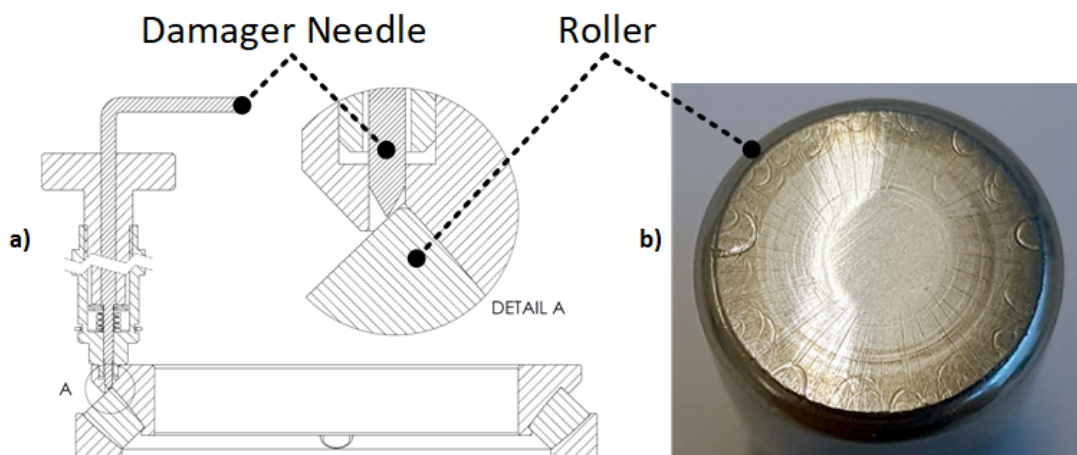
(a) Schematic drawing of the damage mechanism. (b) Scratches on the axial bearing roller end.
